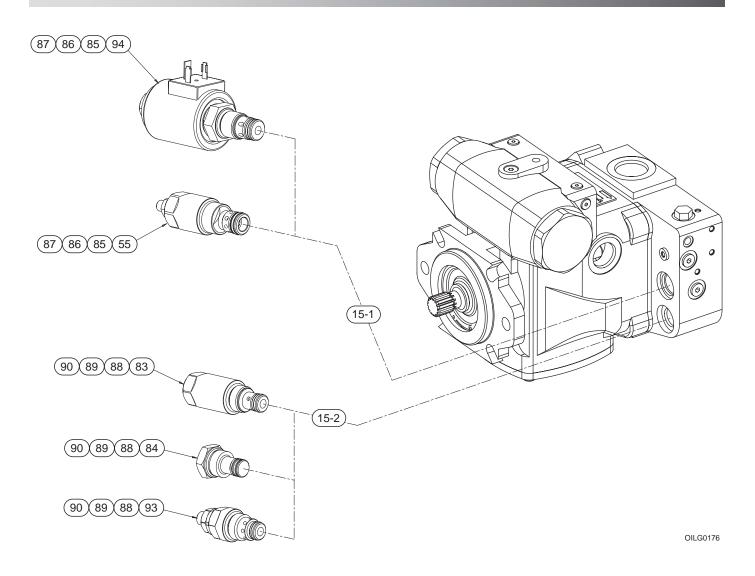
C. Exploded Parts Drawing for PVM-064/-076/-098/-130 C-Frame (519272-302 sheet 3)
